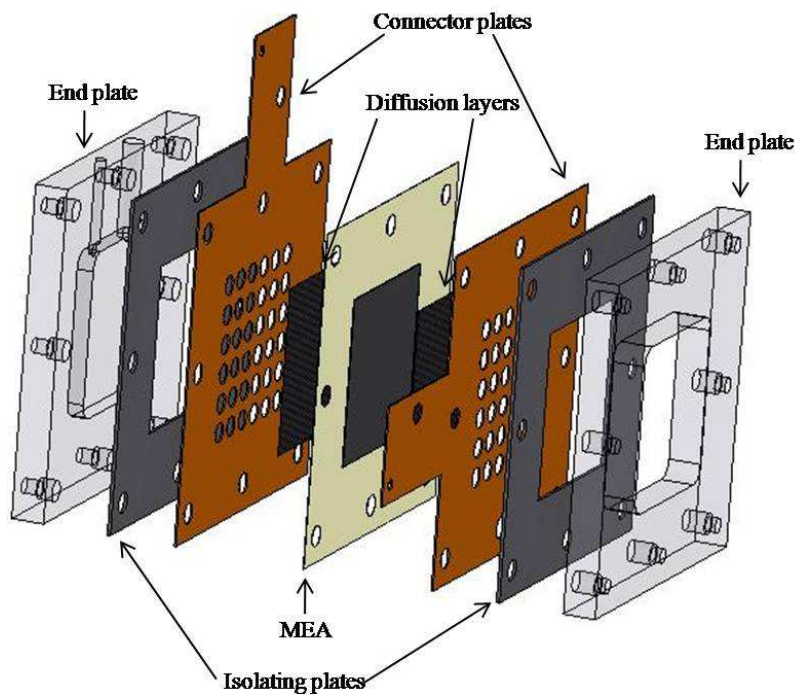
3D CAD drawing of the passive feed DMFC..
